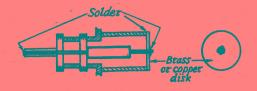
Dummy antenna made by mounting e composition resistor in e PL-259 coaxial plug. Only the inner portion of the plug is shown; the cap screws on after the assembly is completed.
